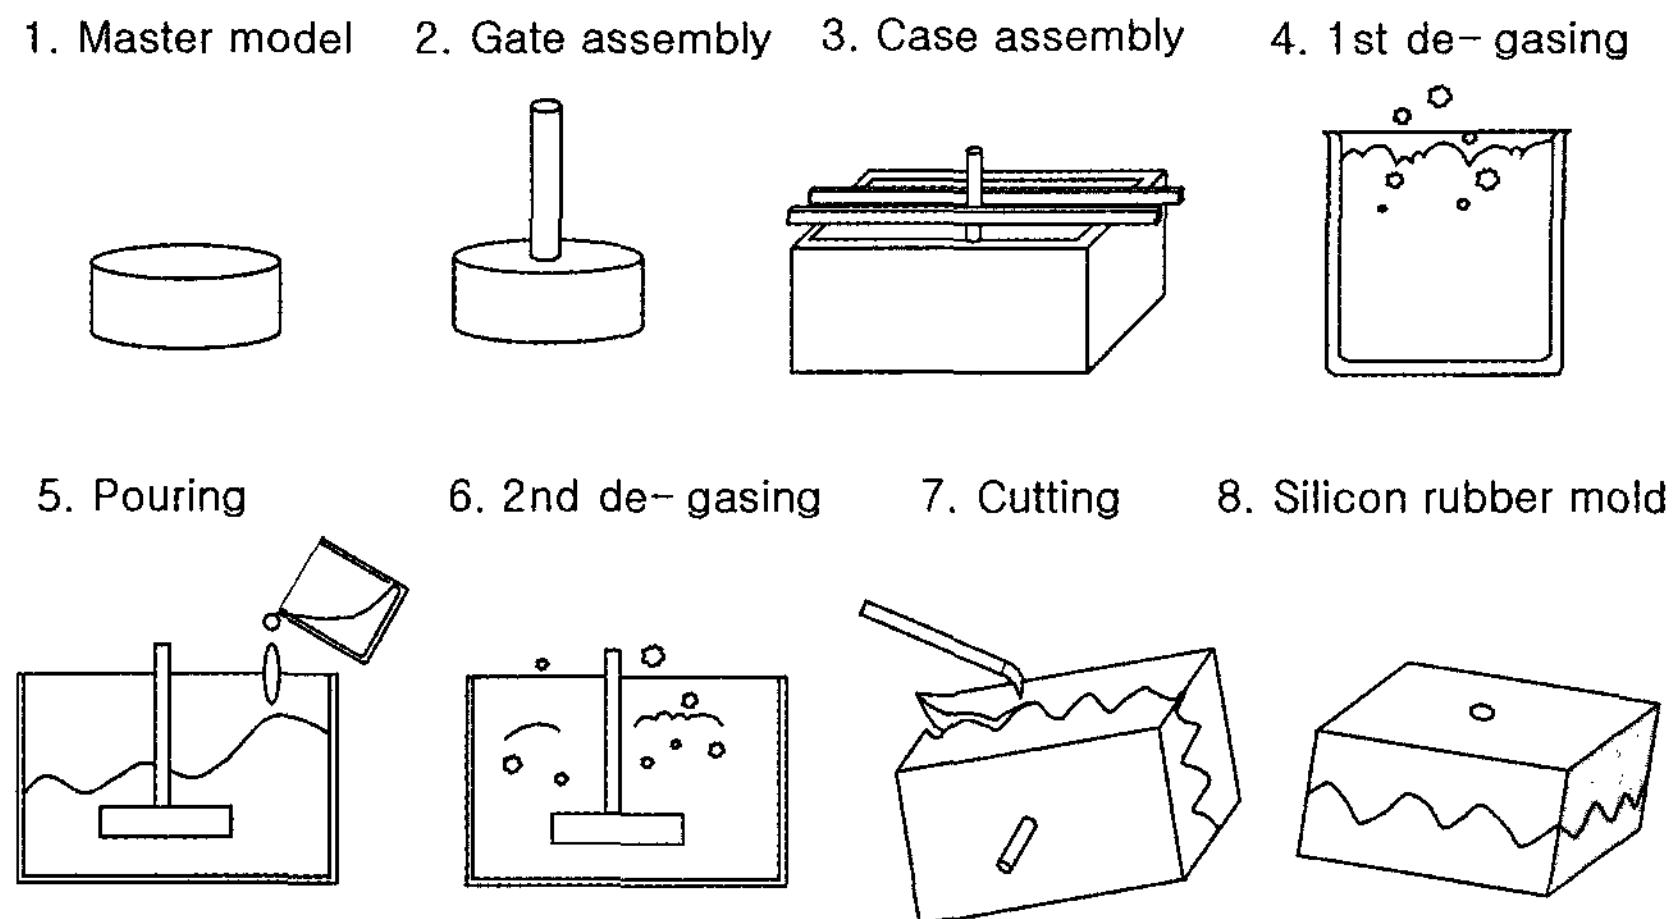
Silicon rubber fabrication process by vacuum casting.
